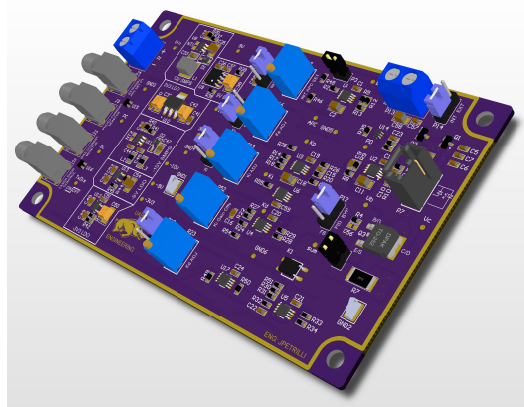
3D rendered angled view of the PCBA using Altium Designer 2017.
